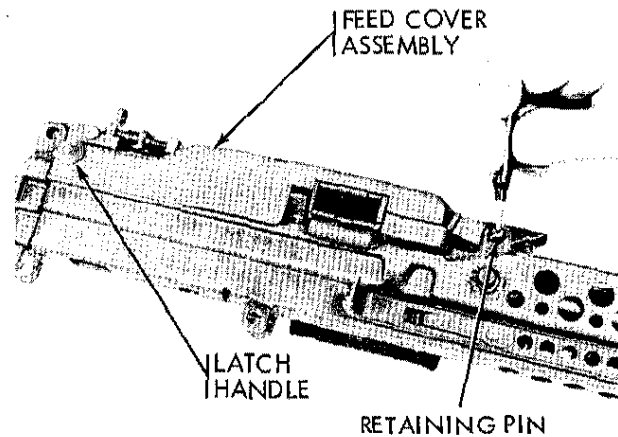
REMOVING FEED COVER ASSEMBLY PIN
